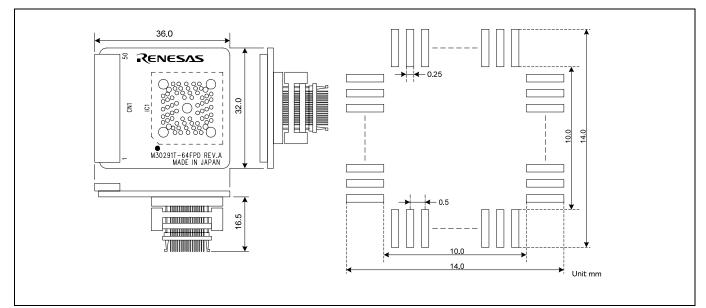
External dimensions and a sample foot pattern of the converter board M30291T-64FPD
